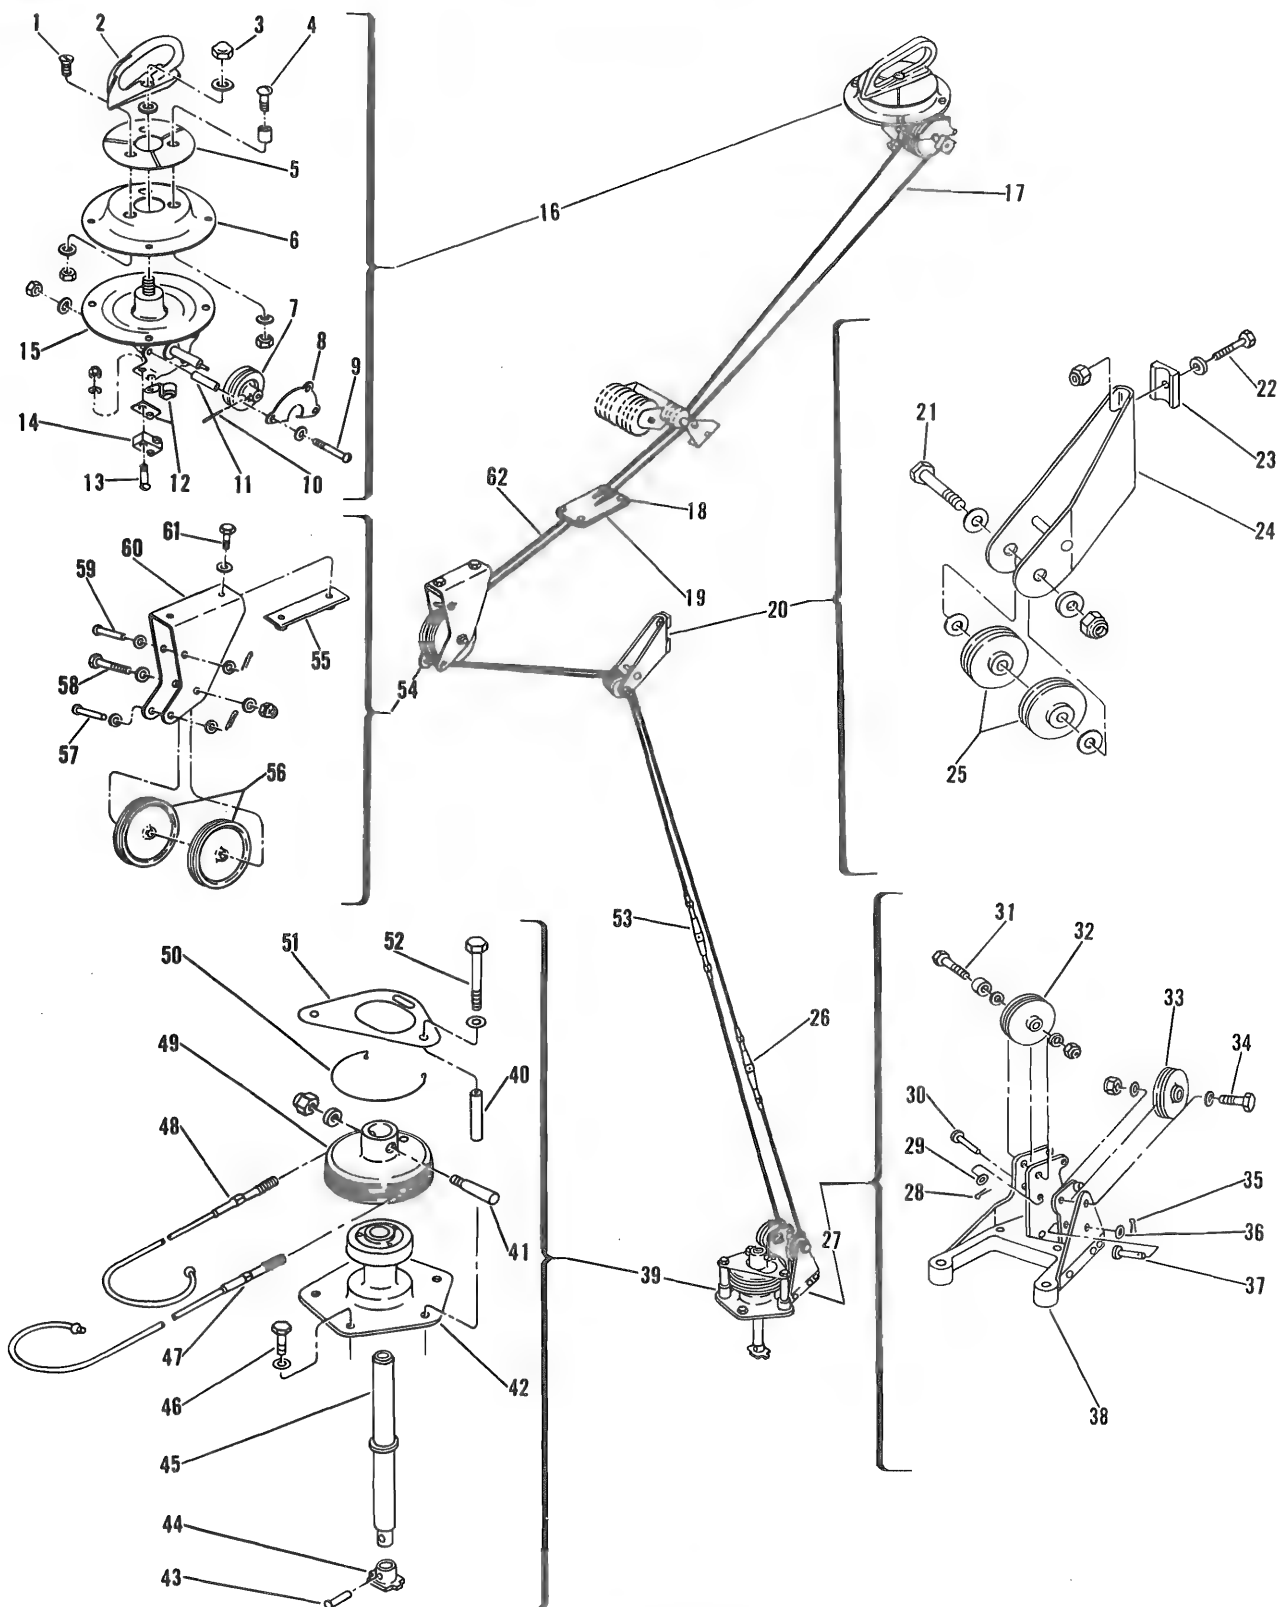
Fuel Selector Valve Control System (Helicopters Serial No. 56-4313 and Subsequent)
